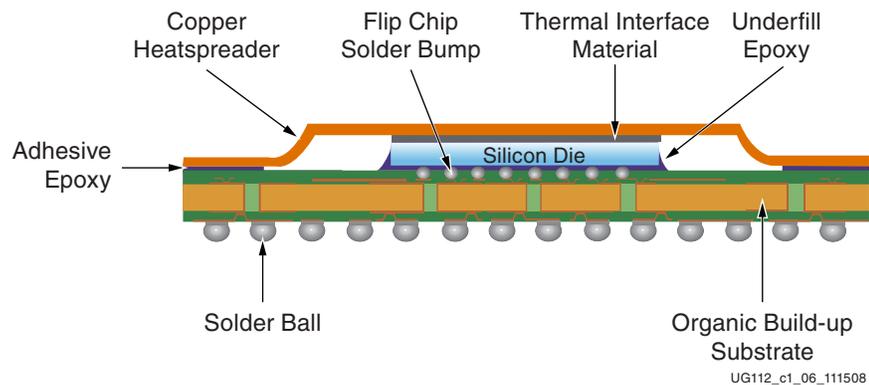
Flip-Chip BGA Package with Type II Lid
